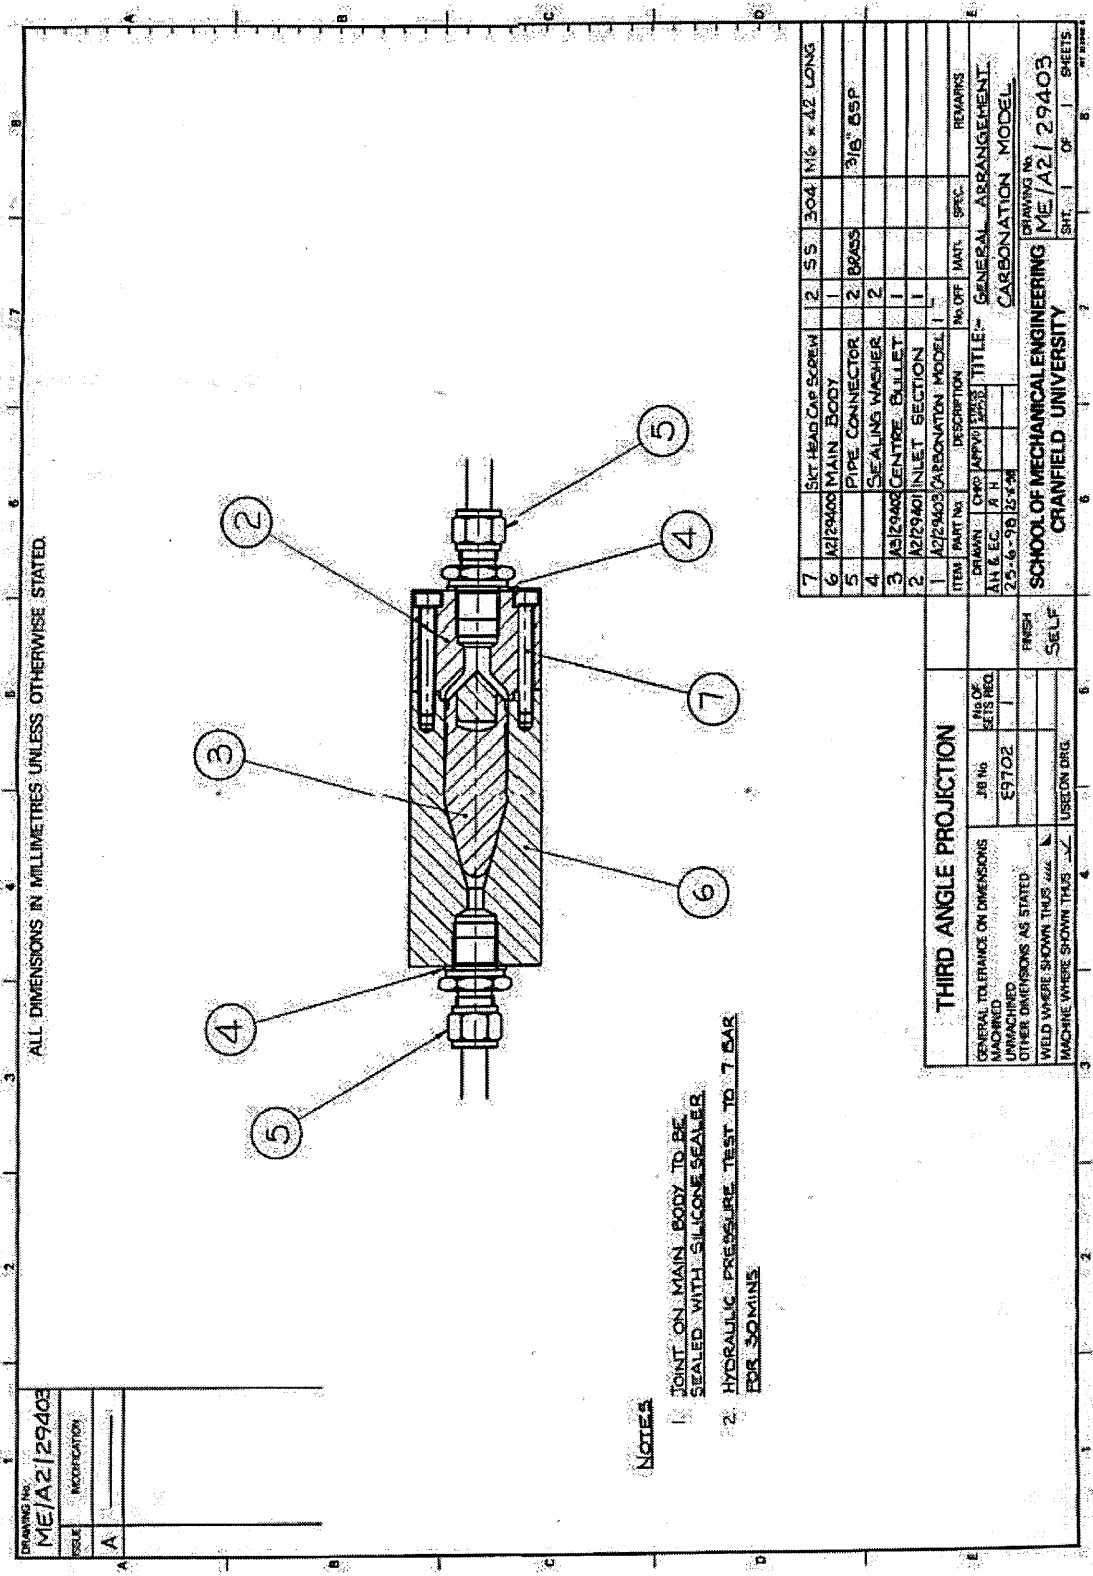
Engineering drawing of the test nozzle – whole nozzle
